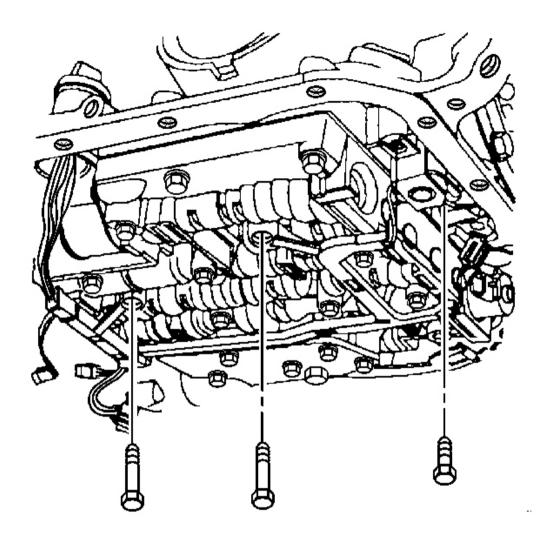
Removing The TCC Solenoid Bolts And The Valve Body Bolts Which Retain The Internal Wiring Harness
